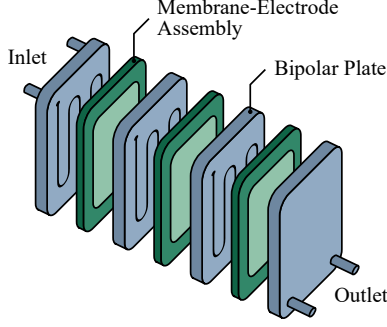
Illustration of fuel cell stack assembly [B]
